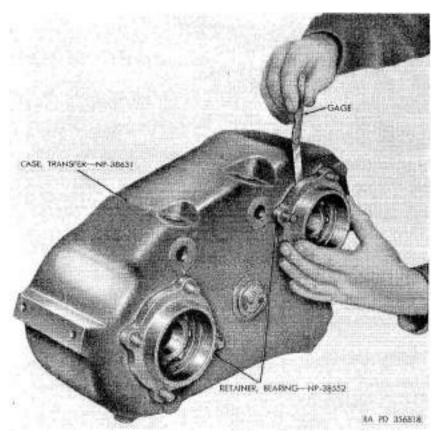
Checking clearance between bearing retainers and transfer case with thickness gage.
